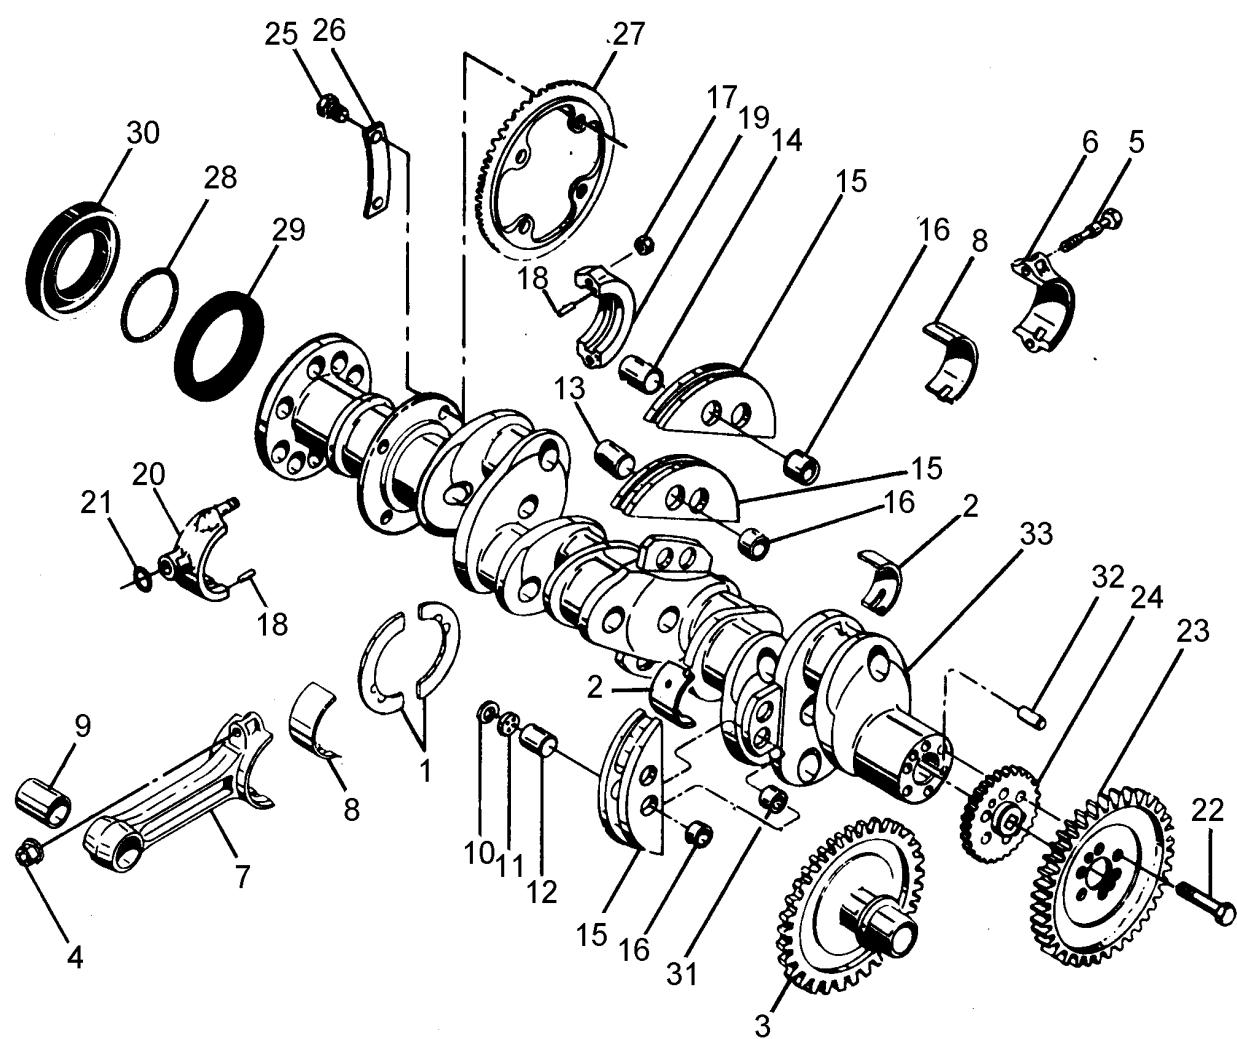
CRANKSHAFT ASSEMBLY
